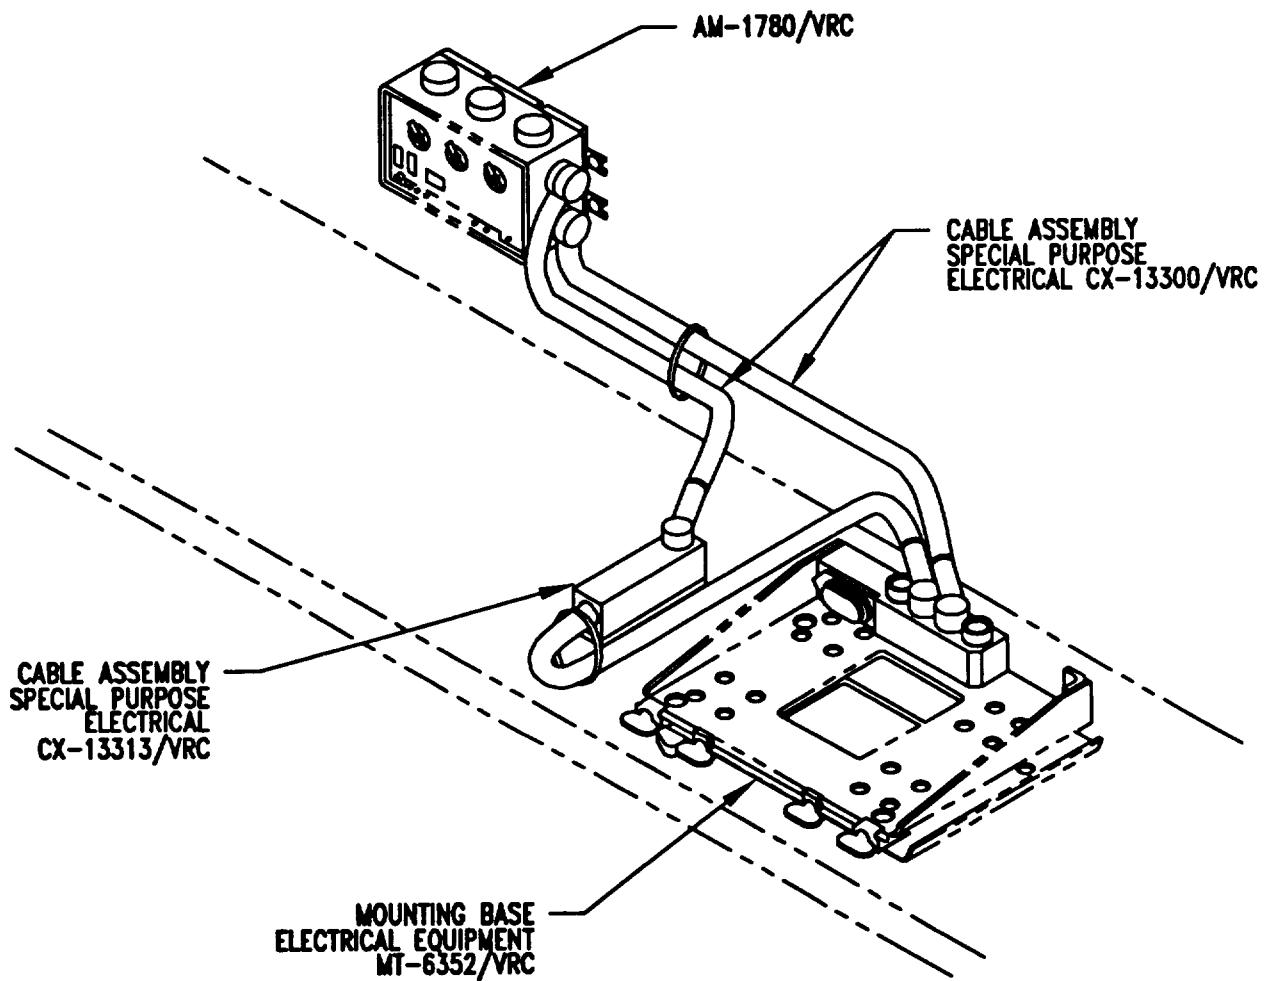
(1). MK and Radio Installation: MK Equipment Locations
